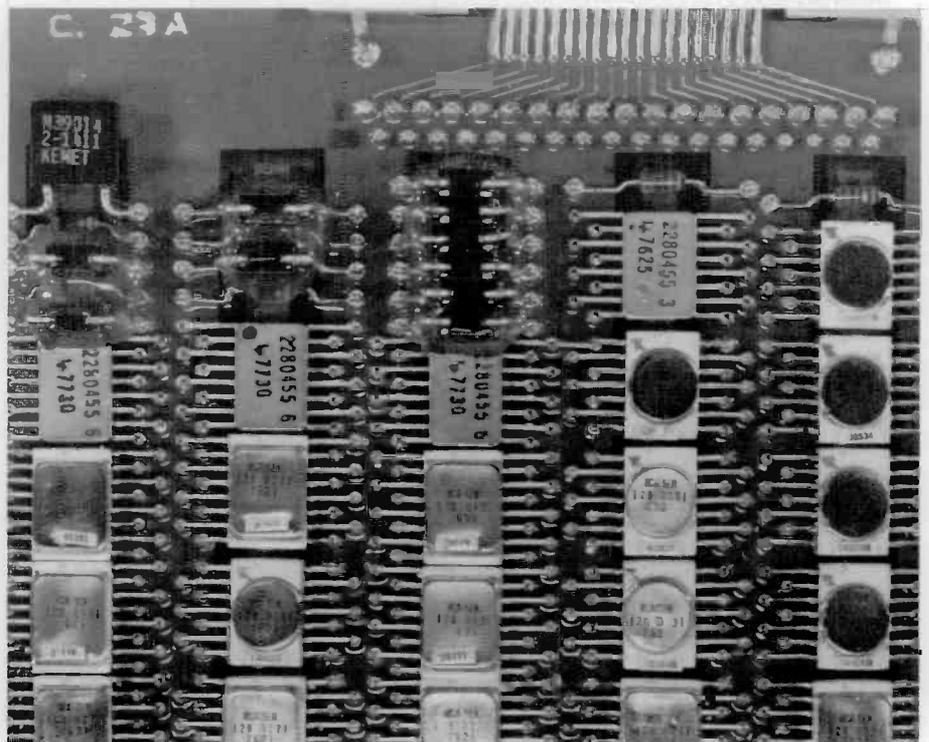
Welded wire board showing flat pack integrated circuits parallel-gap welded into position.
